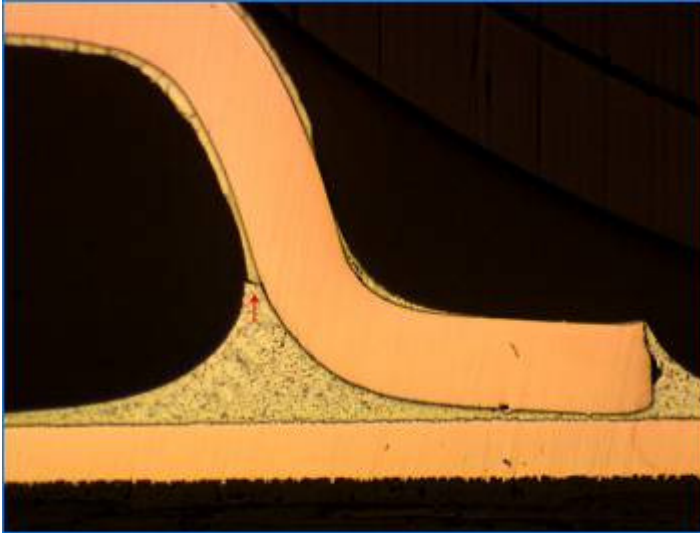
cross section, SN62, U31, right lead solder partial crack, 100x
